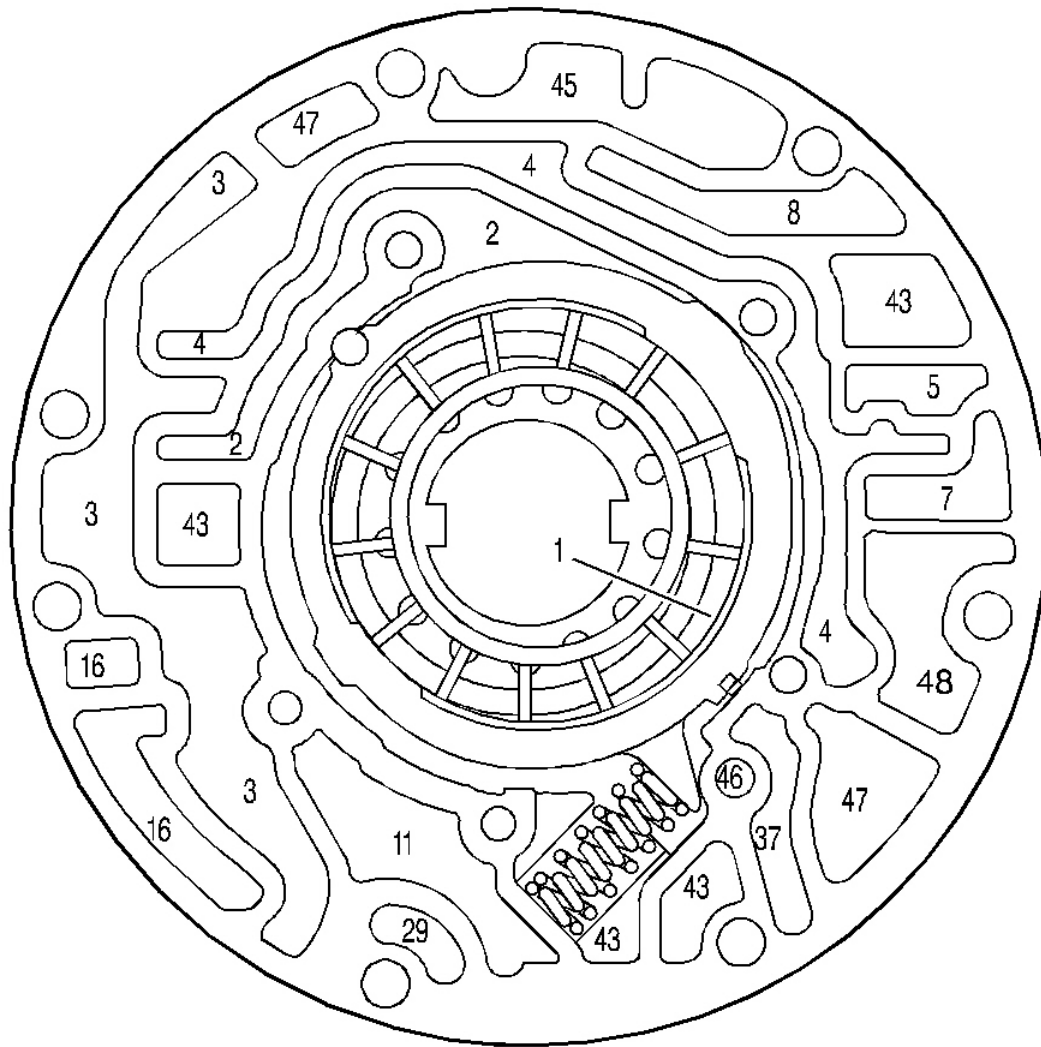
Pump Body Fluid Passages (Pump Cover Side)
